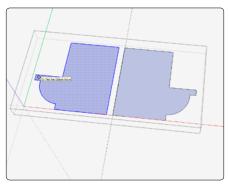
The molded inner edges are complete. The corners must now be coped.
